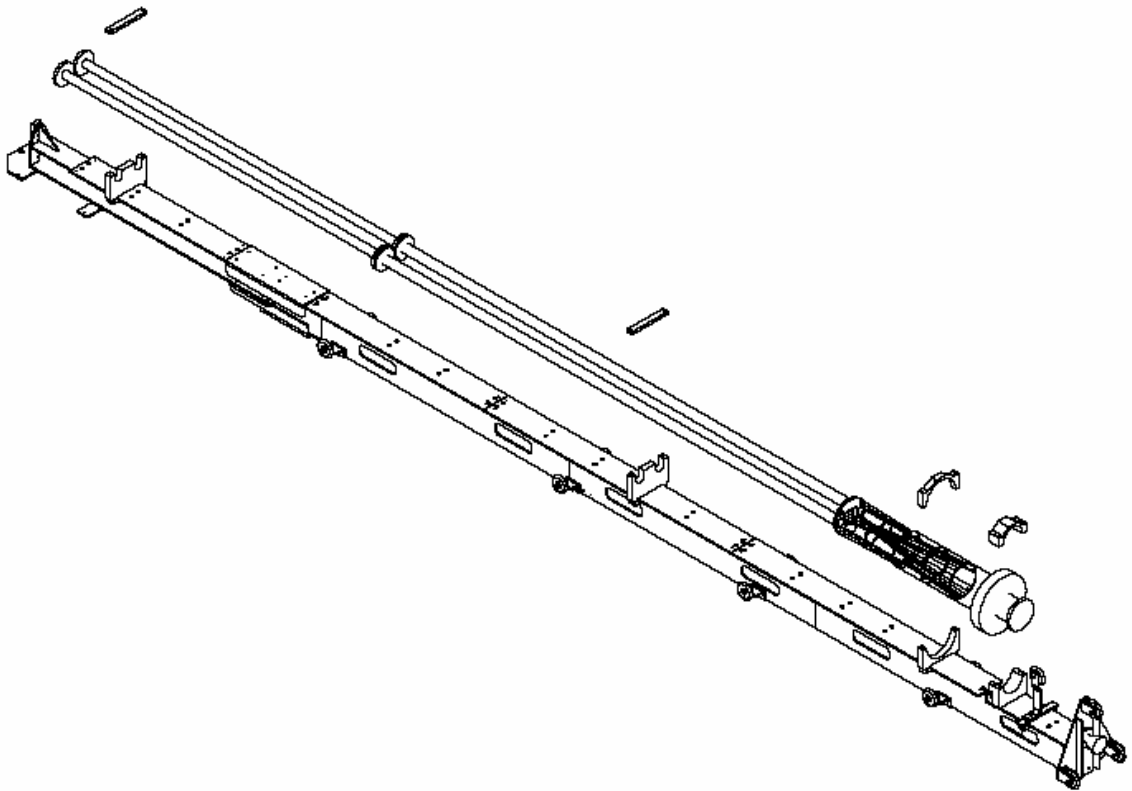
Explosion of the whole Lifting Assembly with the TAN Vacuum Chamber
